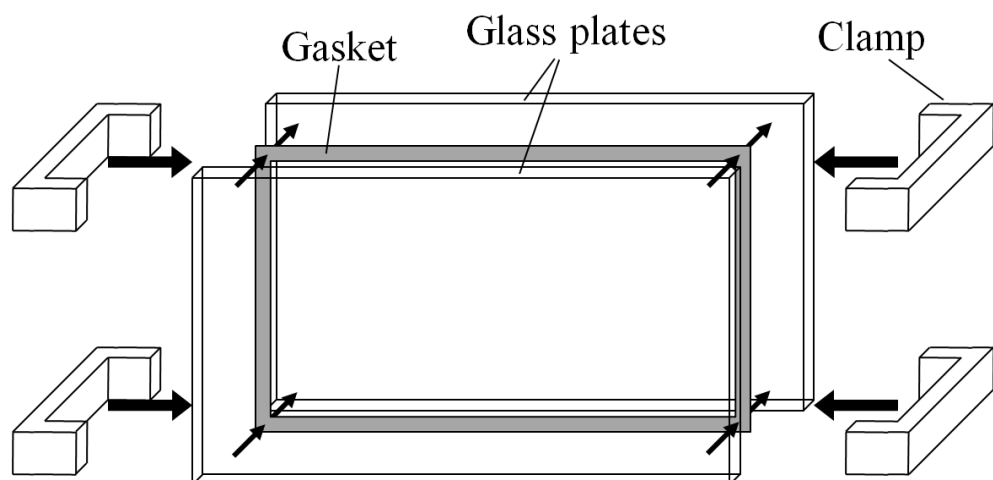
Illustration of assembled glass mould for casting PMMA LSC
